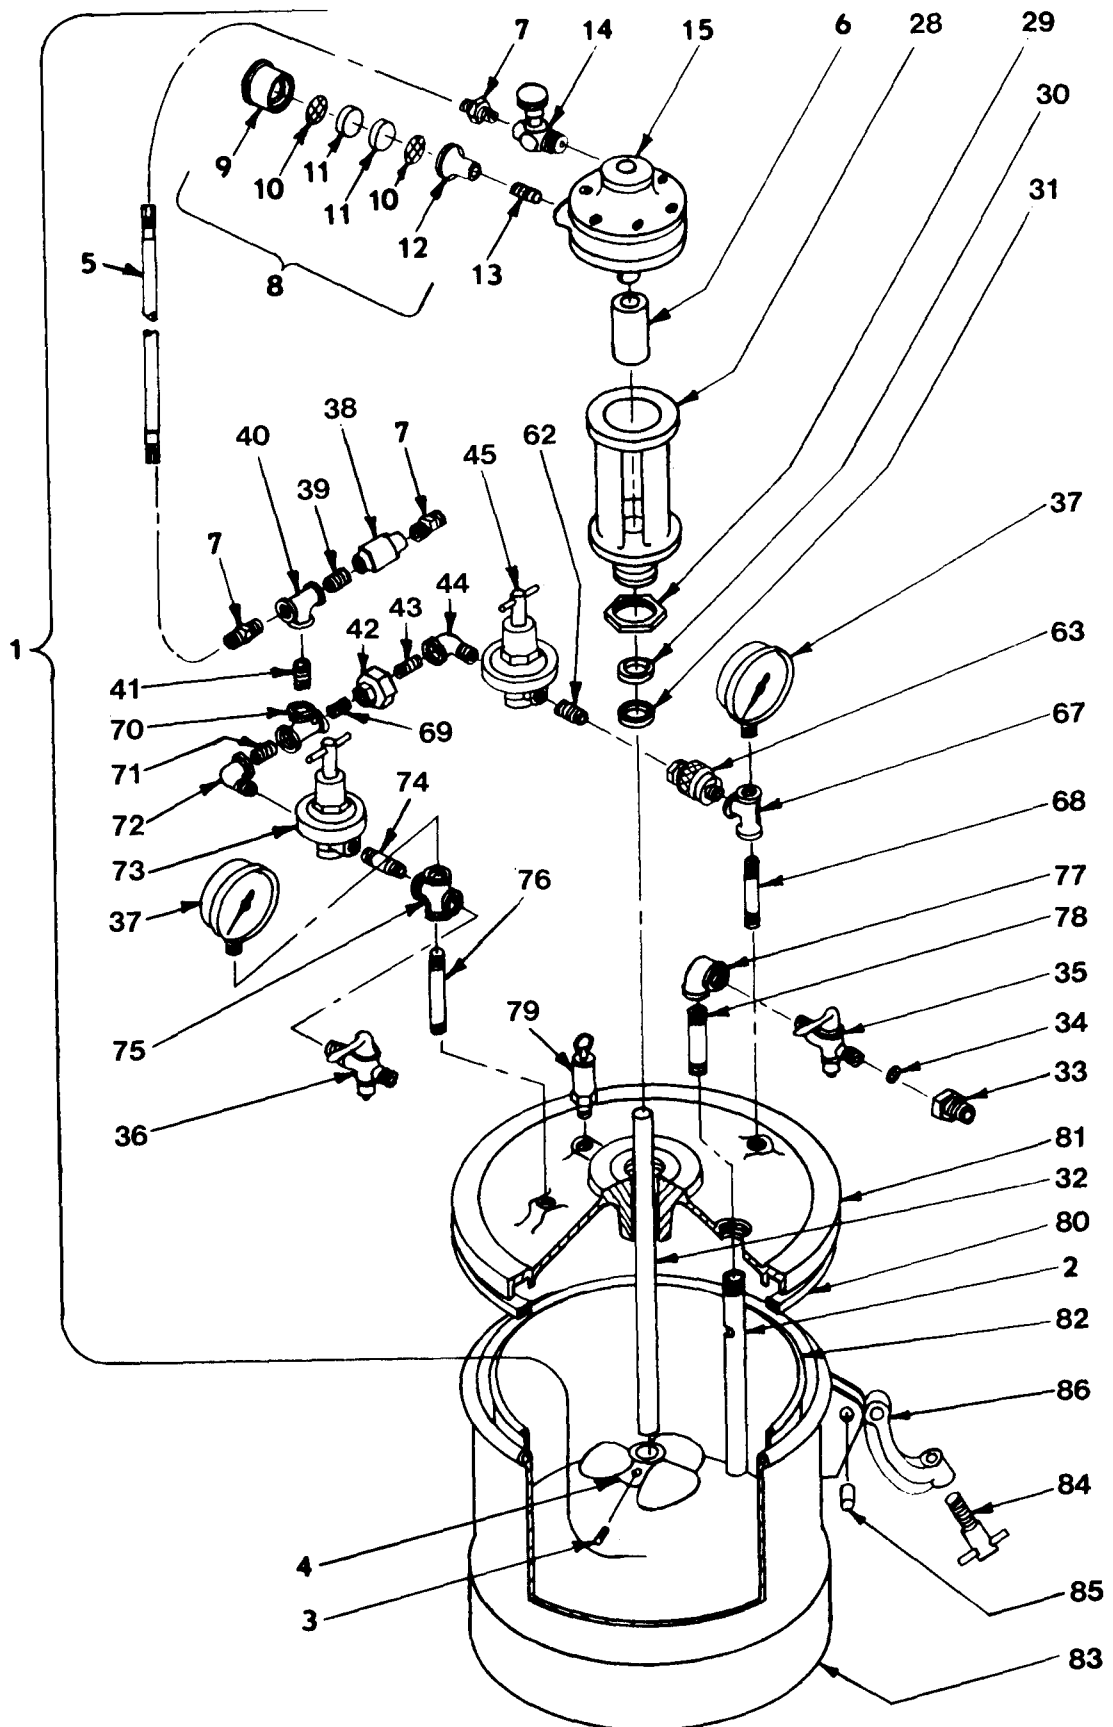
Pressure Tank Assembly (Sheet 1 of 4)
